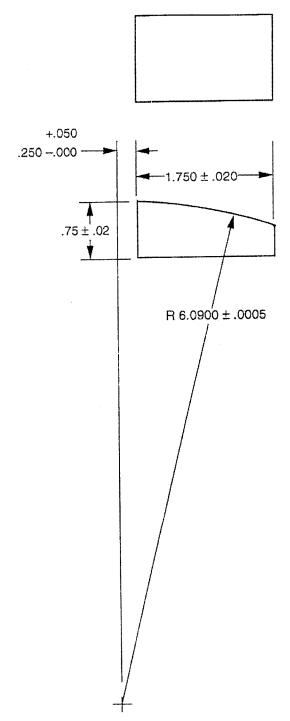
Concave inspection fixture pressure pad. (2 required)
